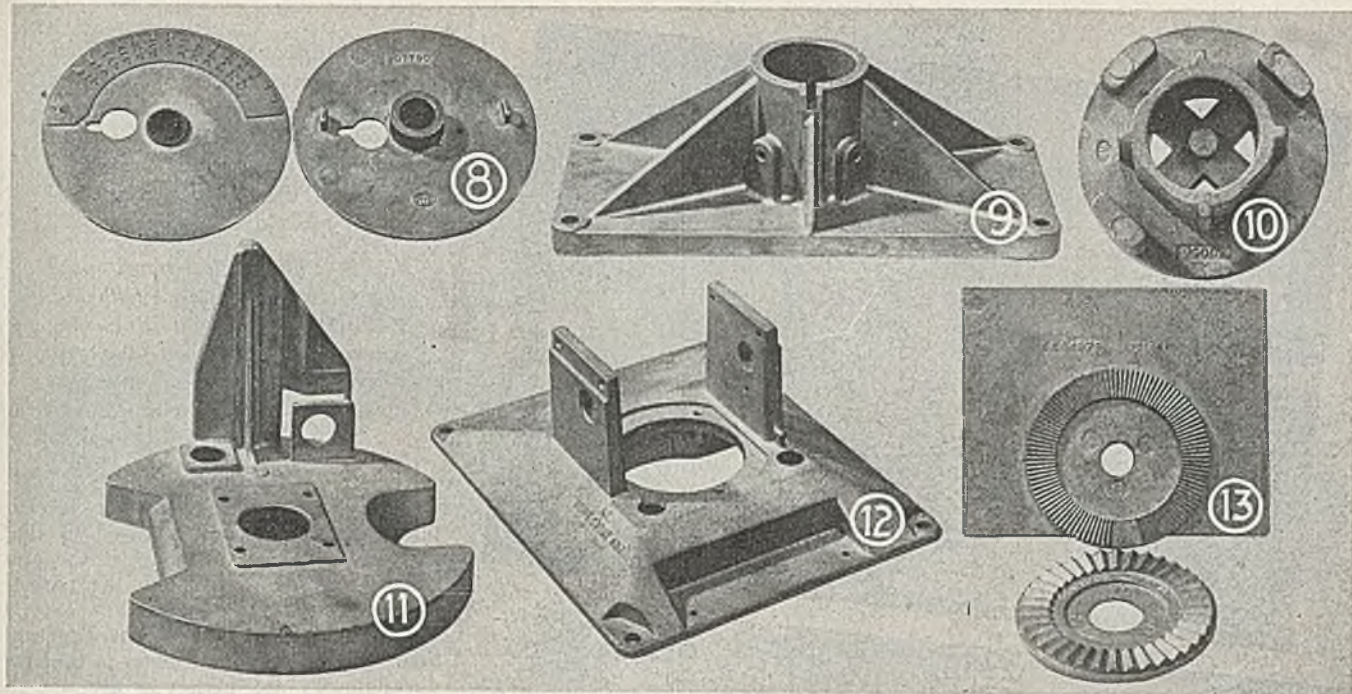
Extremely close tolerances are held on this combination dial and gear blank for a K-13 Vector sight, being 0.001-inch in case of slot at left of hub. Stainless steel insert in center serves as bearing
